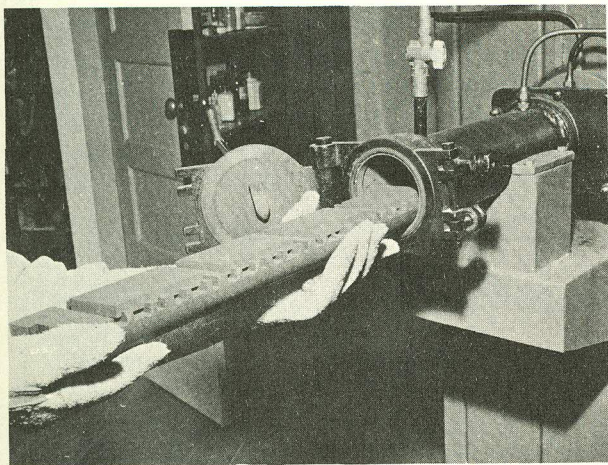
Charging the cermets into the continuous electric sintering furnace under an argon atmosphere
